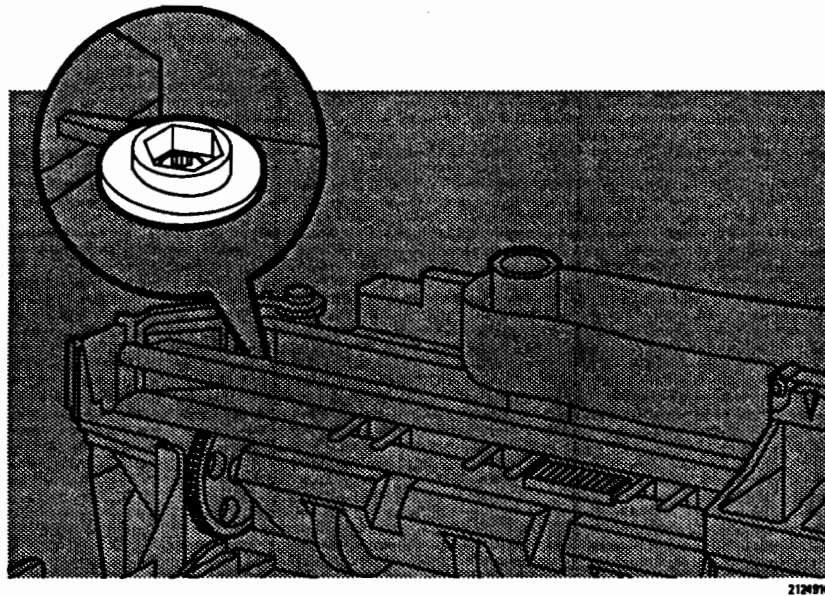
Identifying the Pen-to-Pivot Adjuster
